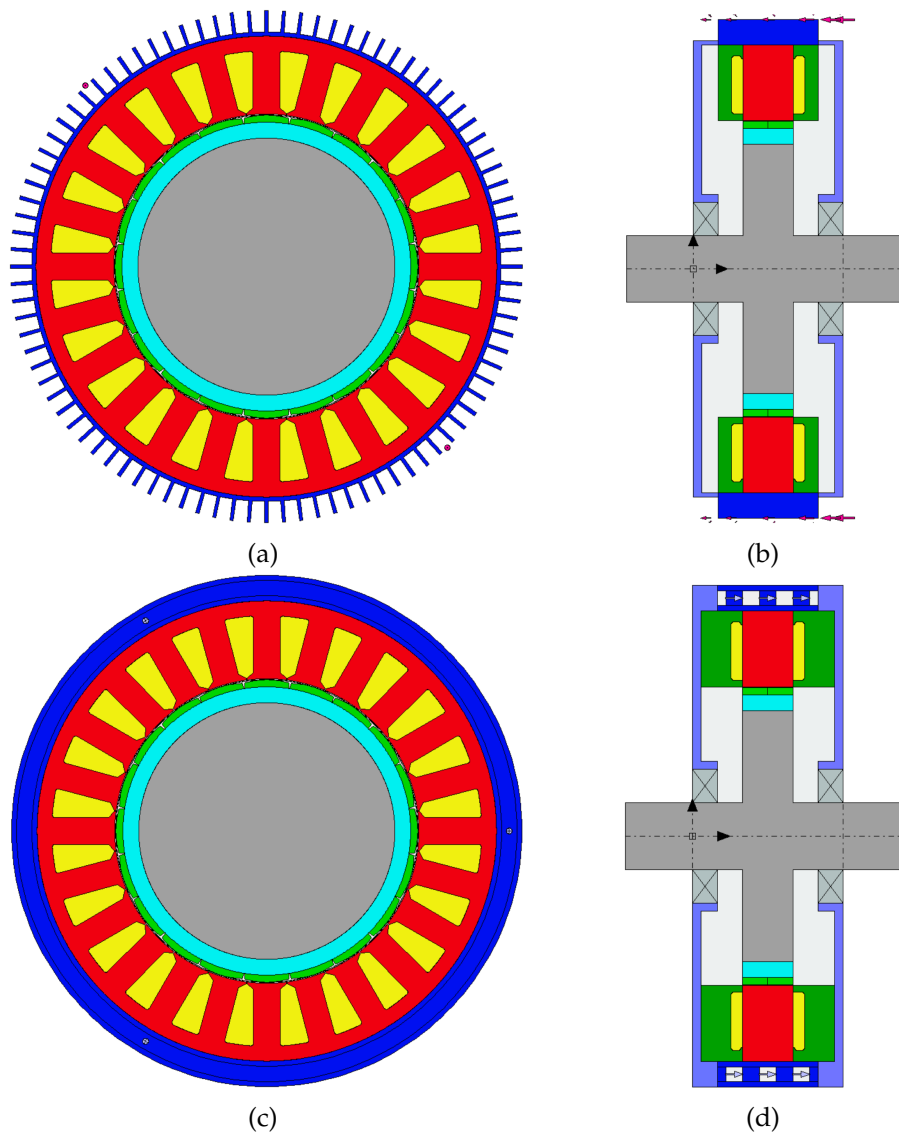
Front and axial view of the machine from Ansys MotorCAD: (a) air cooled front view; (b) air cooled axial view; (c) liquid cooled front view; (d) liquid cooled axial view. The same housing outer diameter was used for both the versions of the machine.
